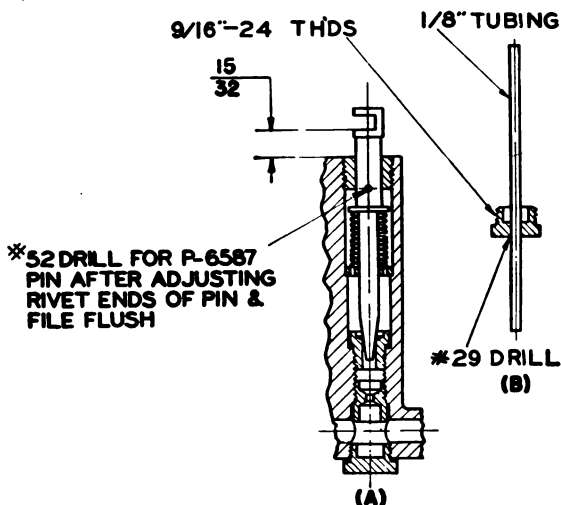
Preliminary adjustment of mixture-control needle valve and holder on NA-R9B carburetor.
